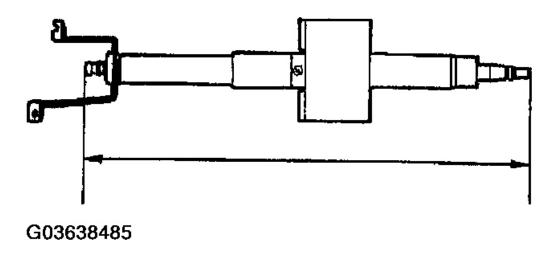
Identifying Steering Shaft Length Courtesy of MAZDA MOTORS CORP.
